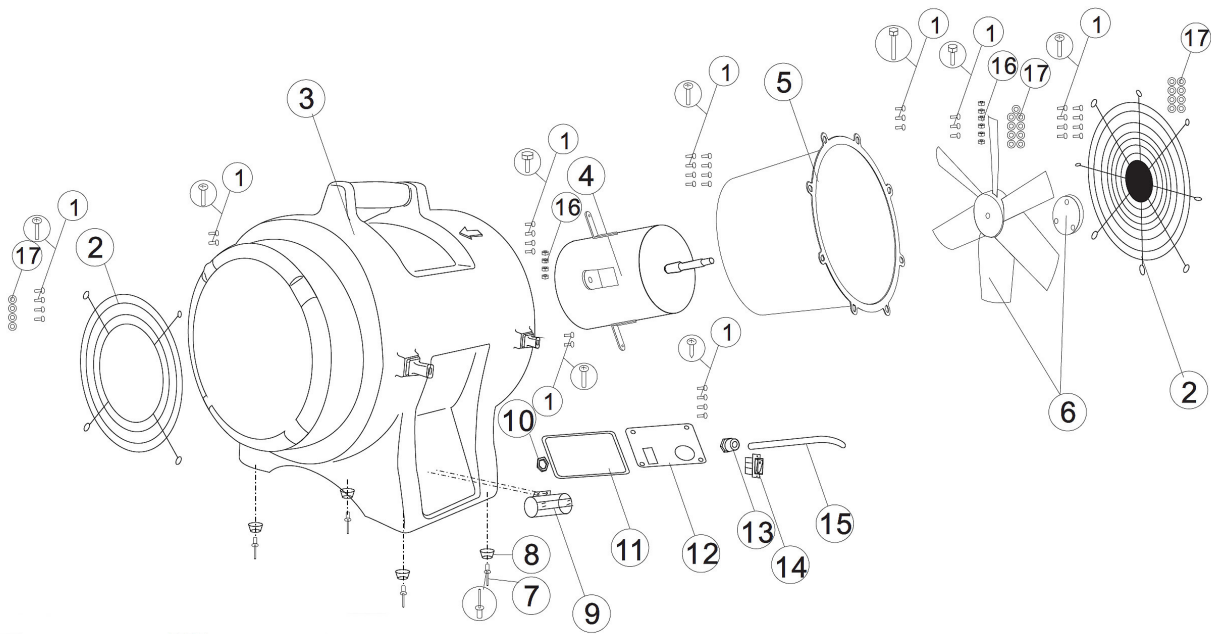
Spare parts drawing MVT 200 P and MVT 300 P
